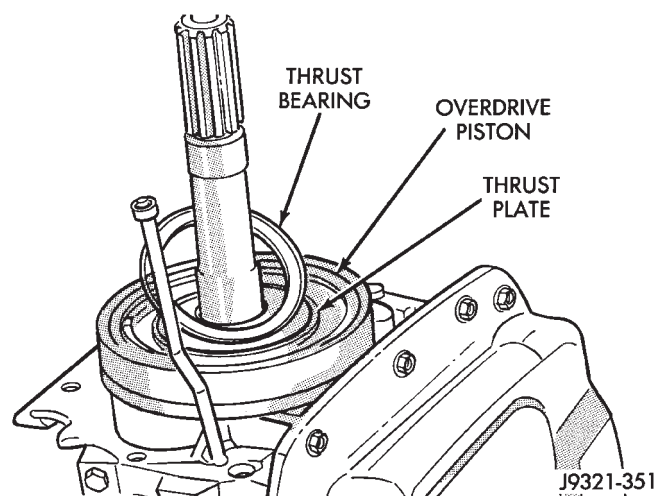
Overdrive Piston Thrust Bearing Removal/Installation
